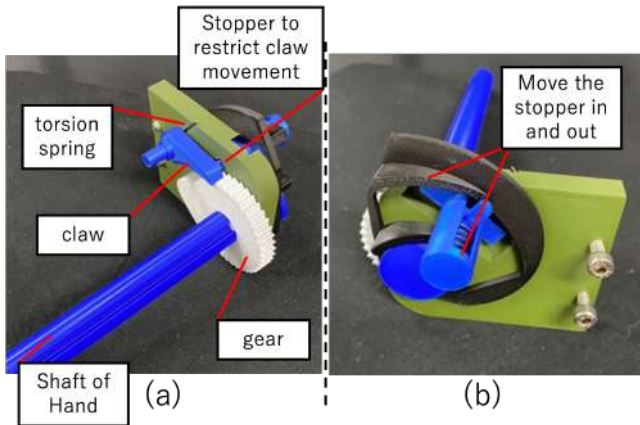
Locking mechanism: (a) front side and (b) back side.
